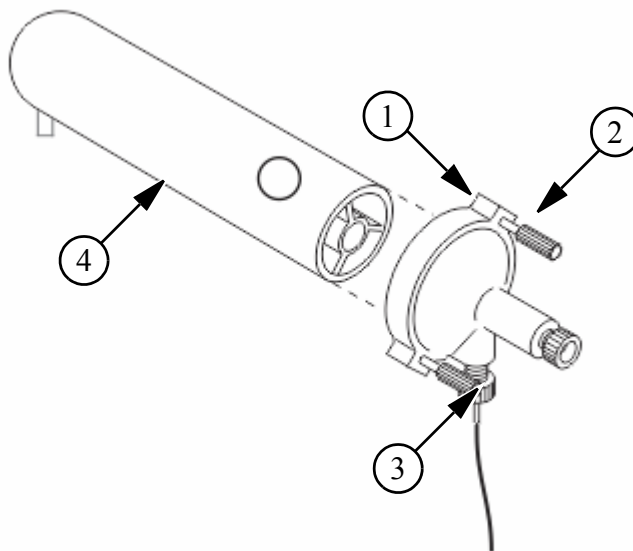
The nebulizer/end cap assembly removed from the spray chamber. Illustration shows cross-flow nebulizer end cap assembly.
